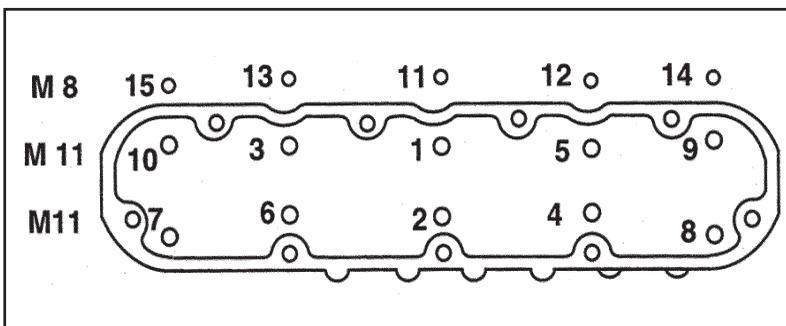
Cylinder head torque sequence for 5.7L GM engine using 8 mm and 11 mm head bolts.
